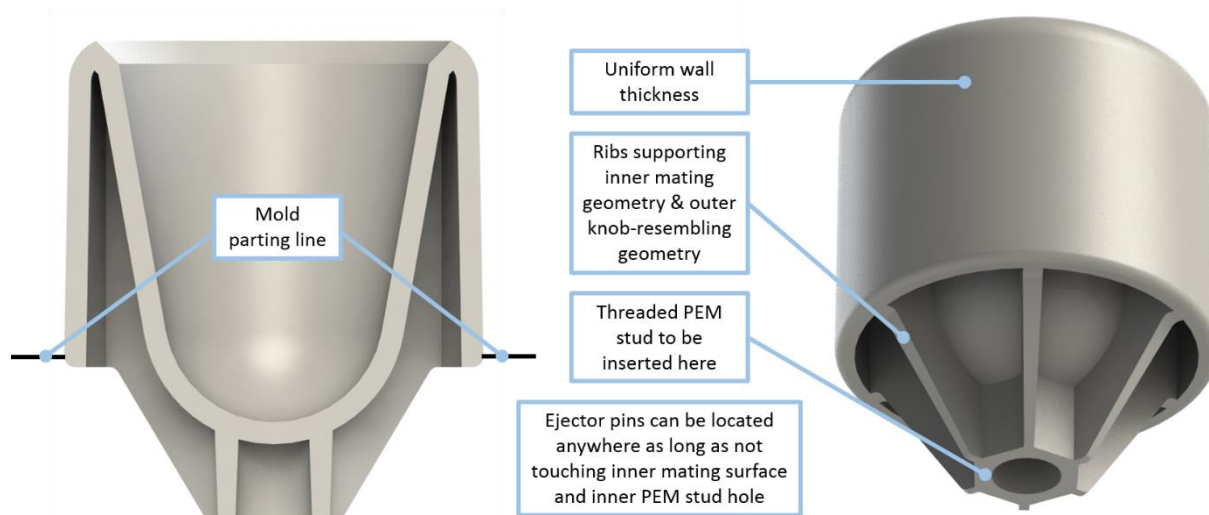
Adapter design after DFM considerations: cross-section & isometric view
